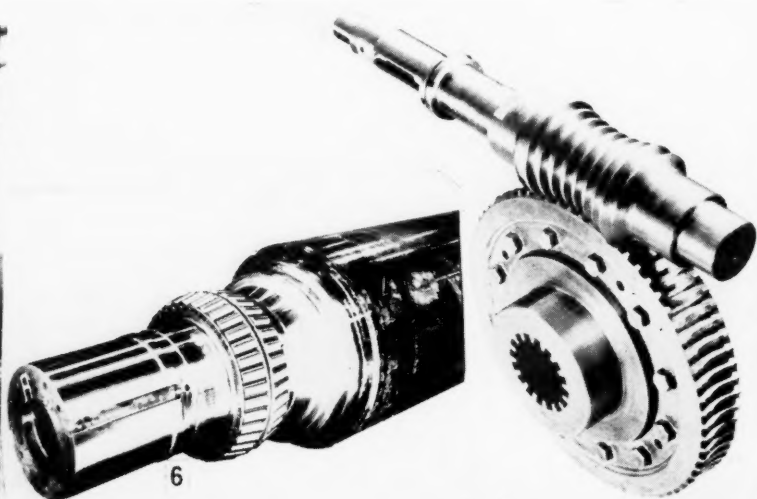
Inner Roller Bearing Race and Roll Cage on the Neck of Calender Roll
